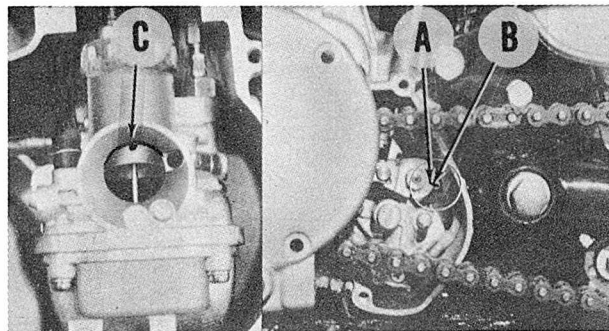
Remove carburetor cover and observe that index mark on throttle slide aligns with top of bore when marks on oil pump lever and pump body align. Turn cable adjusters to correct.
